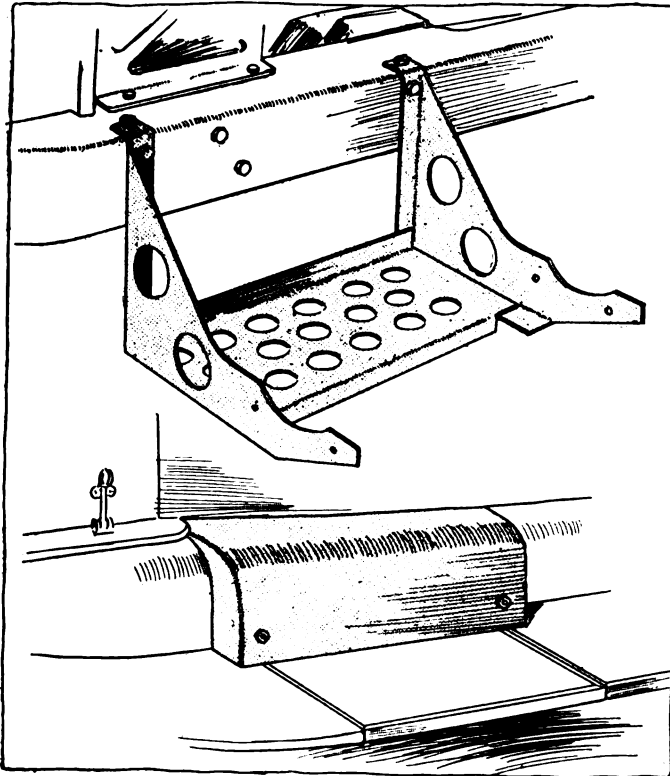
Upper—Steel cradle attached to chassis side member for support of battery
